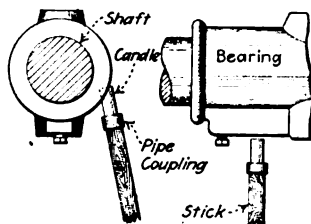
Feeler for detecting heating of inaccessible bearings. (The behavior of the candle when pushed against a hot bearing may be tested by pushing it against a feed-water or low-pressure steam pipe.)
